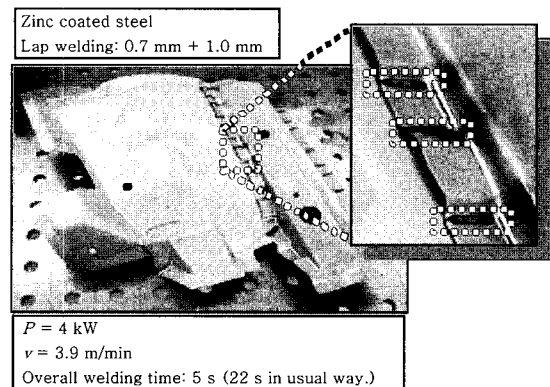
Remote laser welding of floor panel of car (Courtesy of Trump Co.)
